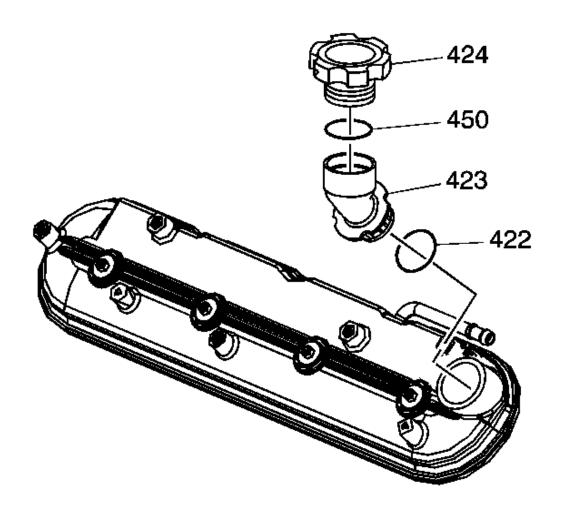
Oil Fill Cap & Oil Fill Tube Courtesy of GENERAL MOTORS CORP.
